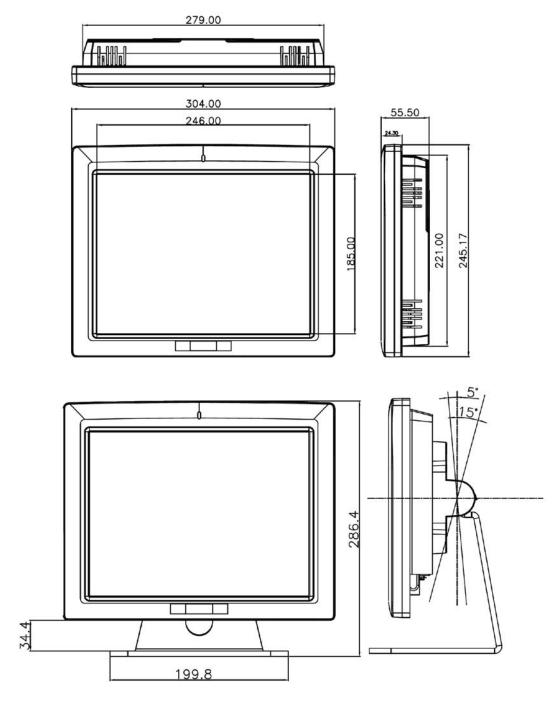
AFL-12B-9103-R10 Dimensions (units in mm)
